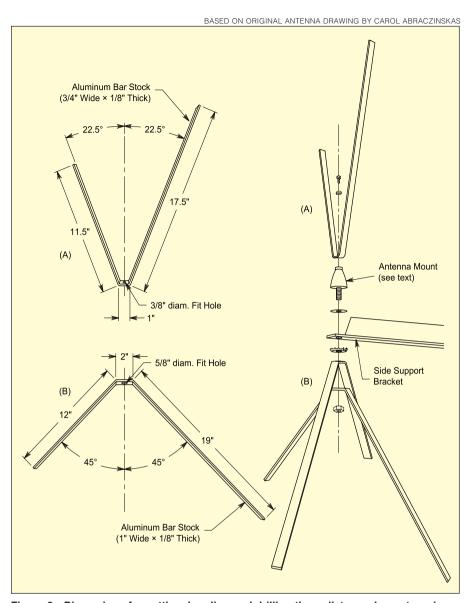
Dimensions for cutting, bending and drilling the radiator and counterpoise elements are shown, along with an assembly diagram.
